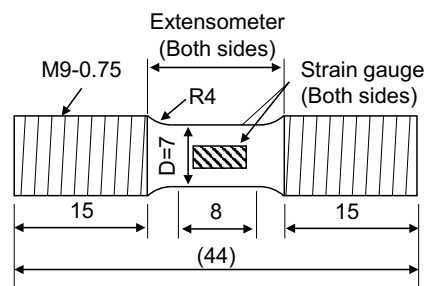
Shape and dimensions of the specimen for uniaxial tensile tests with positions at which wire-strain gauges were pasted.
